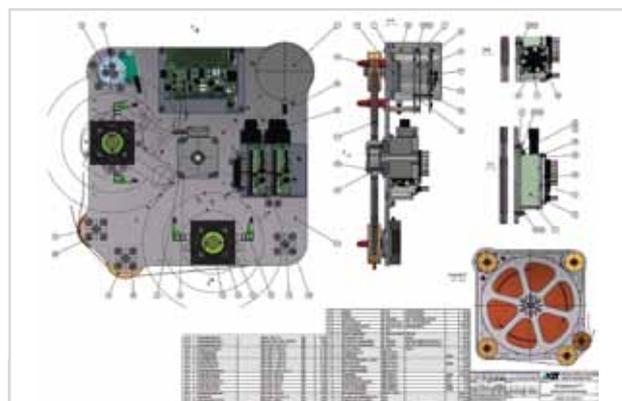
Technical drawing of the winding hand for the robotic winding. On the front (left) is the servomotor, tensile force sensor and revolution counter with associated electronics as well as the two quick-change adapters. On the reverse side (lower right) is the HTS supply-reel.
